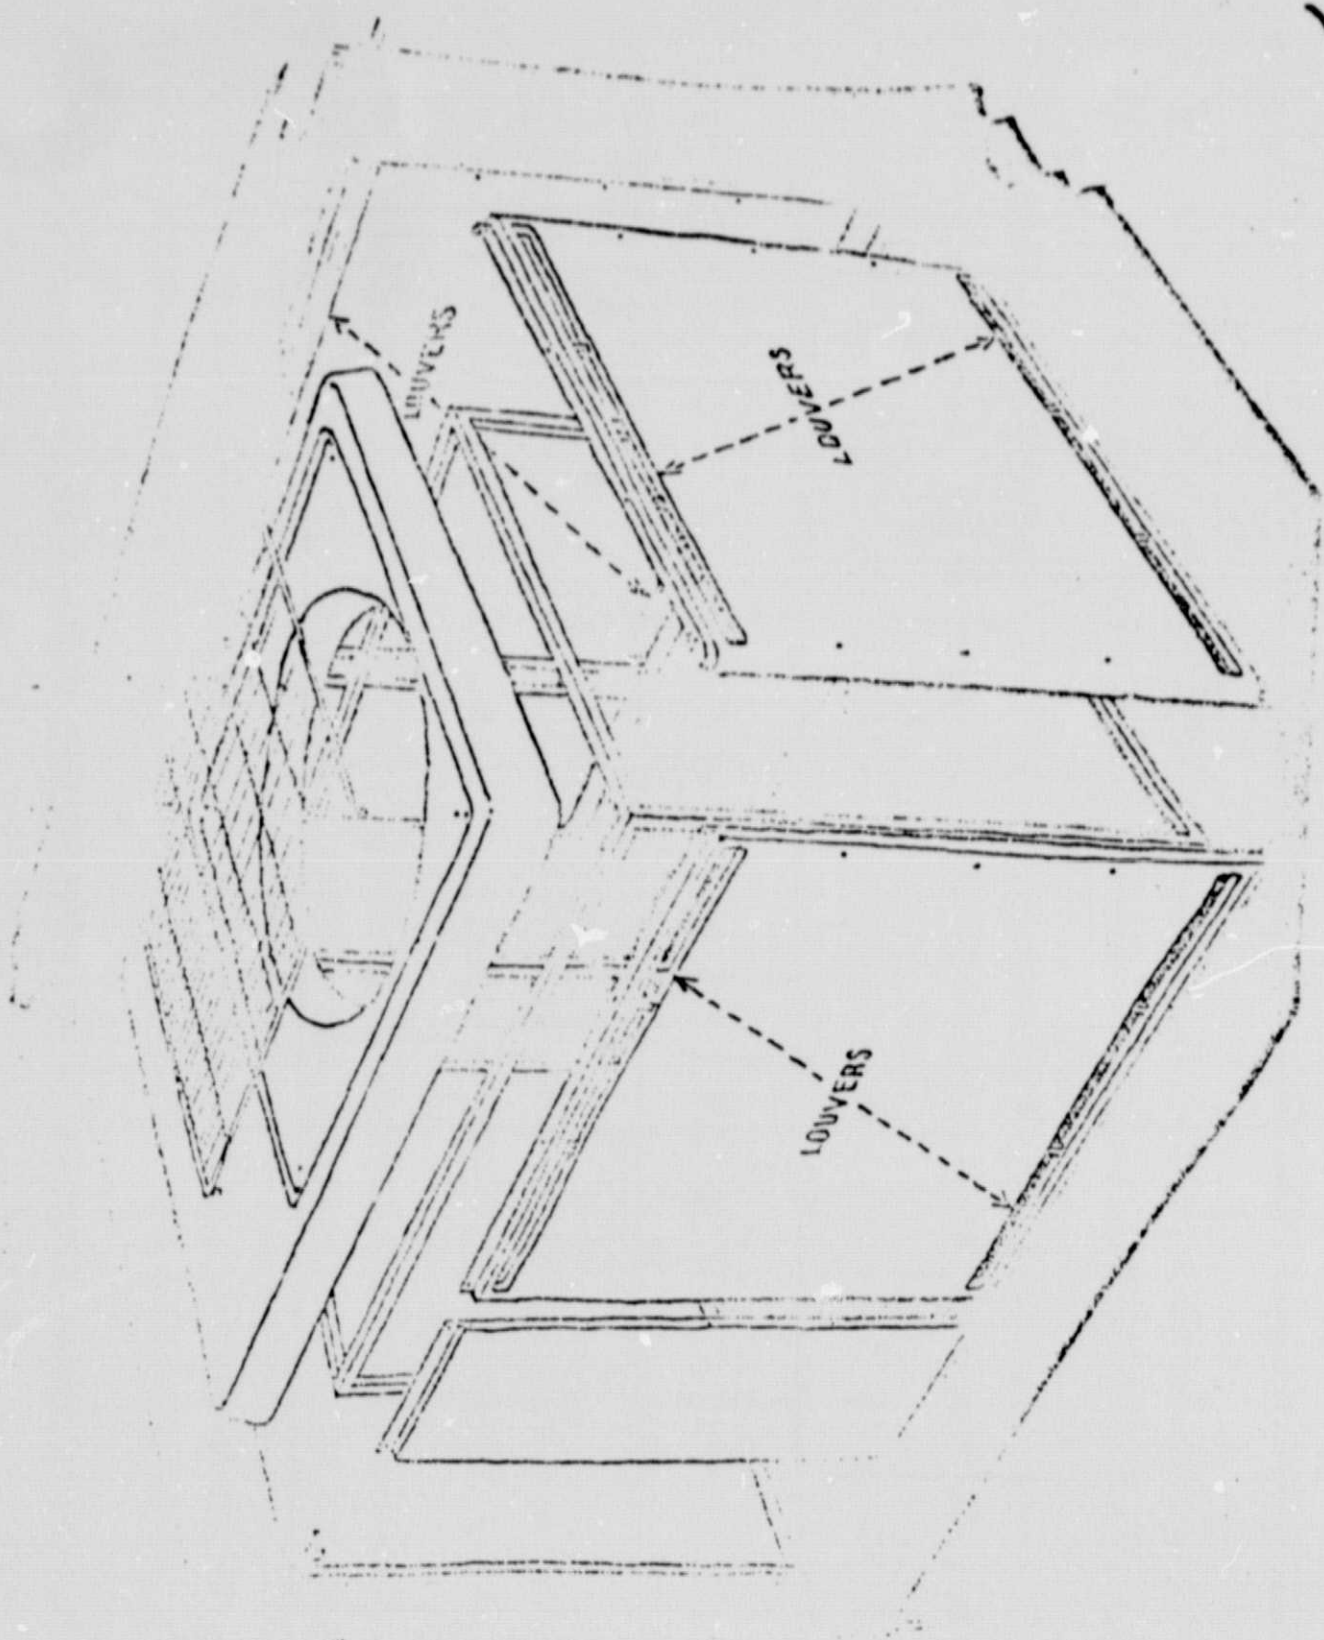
3-Ton Outer Cabinet/Frame Assembly
